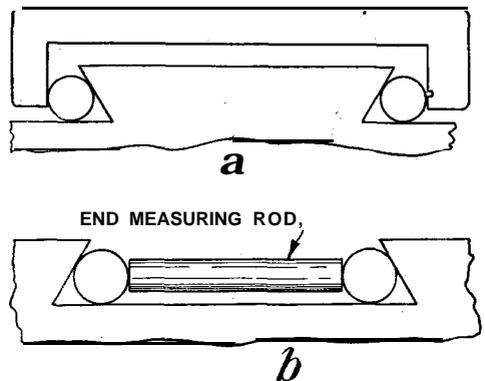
Gauging with separate rollers (a) checking a male slide by a limit gap gauge (b) checking a female slide by end measuring rods.
